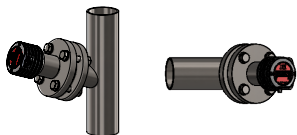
PR-43-GP-73-K76-P25-L12-SS... dimensions
